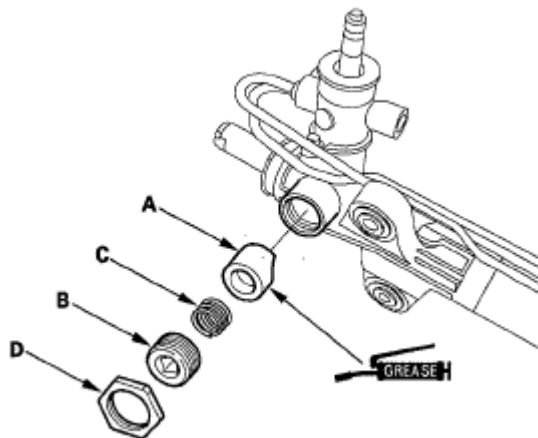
Identifying Multipurpose Grease To Sliding Surface Of Rack Guide
